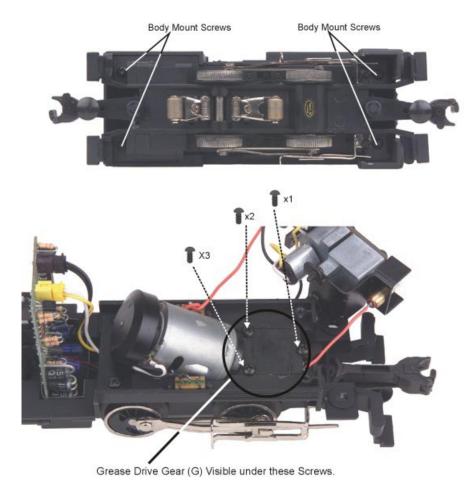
Locations of the Body Mounting Screws and Adding Grease to the Gear Box
